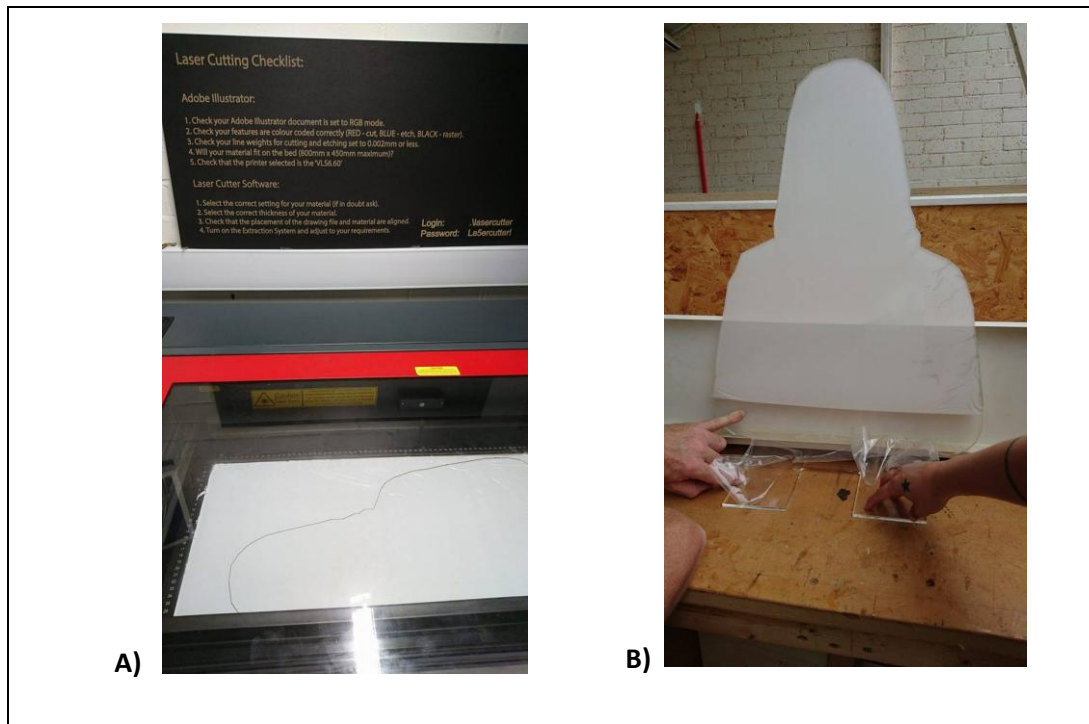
A: Laser cutting machine after action. B: Moulding the base in 90 degrees from the silhouette.
